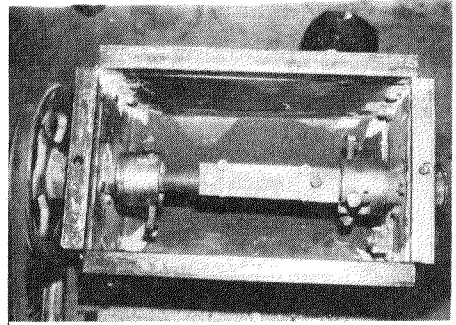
(b) Shot peening equipment without cover, showing the fixture & strip.
